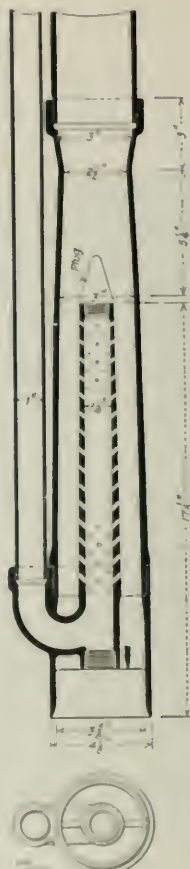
SECTION OF FOOT PIPE OF THE SULLIVAN AIR-LIFT PUMP
